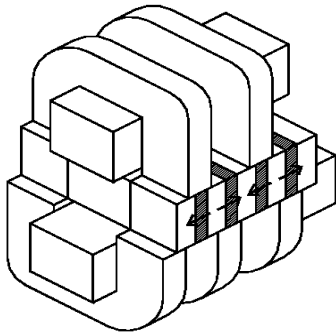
TFFM machine with double-sided with double-winding
